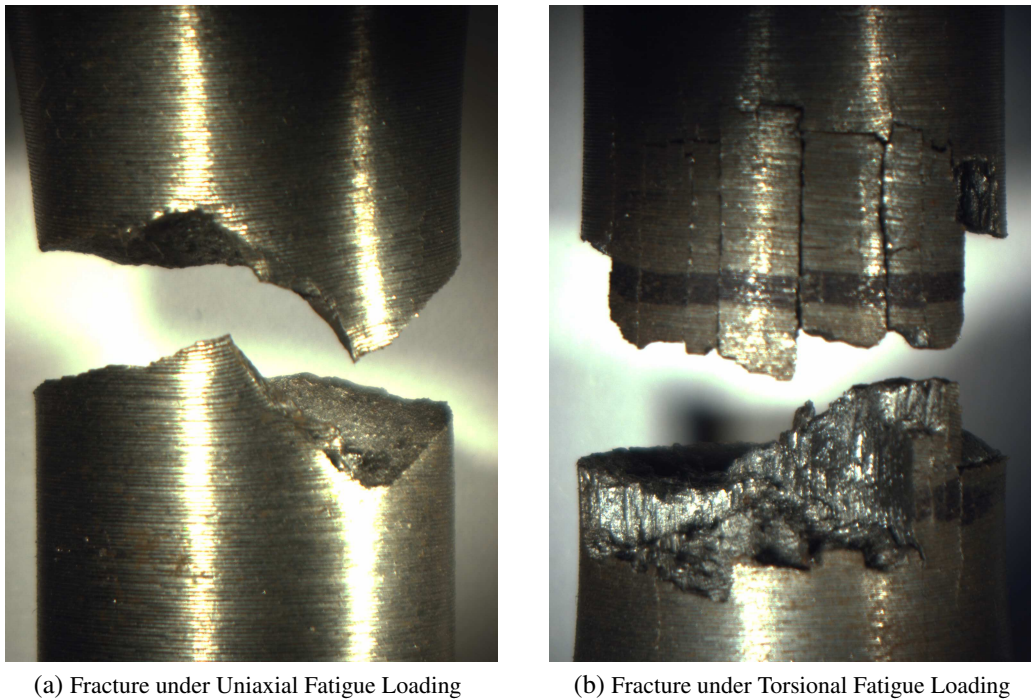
Crack Orientation and Fatigue Fracture
